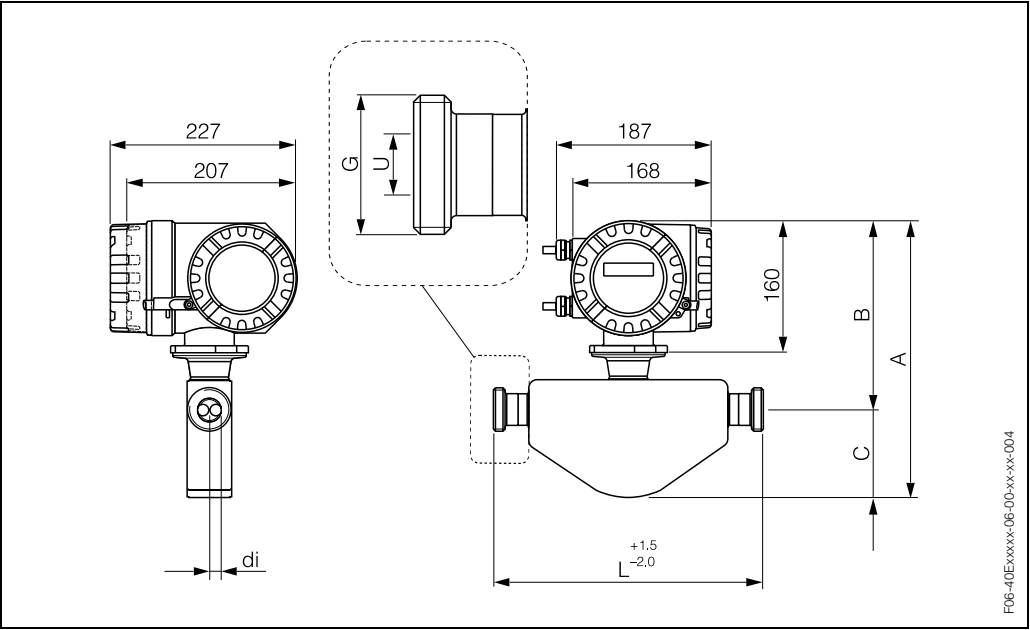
Dimensions Promass E: DIN 11864-1 Form A connections (threaded unions)
